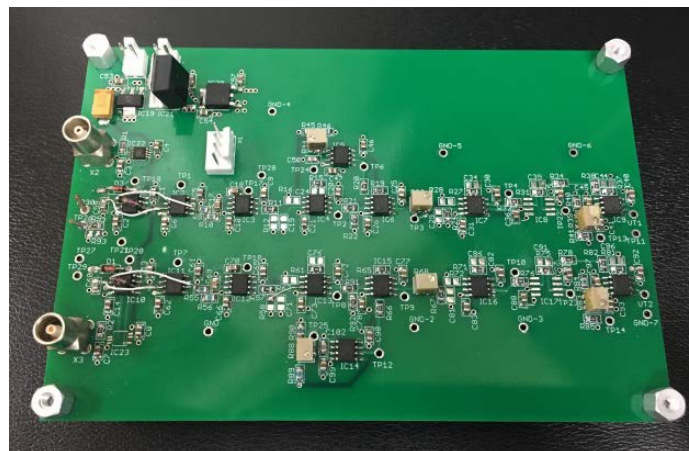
AGD Feedback PCB used in AGD benchtop system testing.
